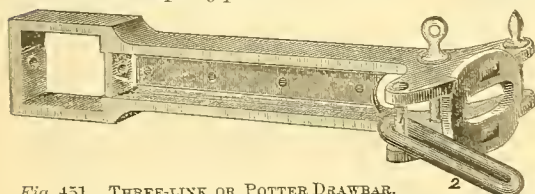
THREE-LINK OR POTTER DRAWBAR.
